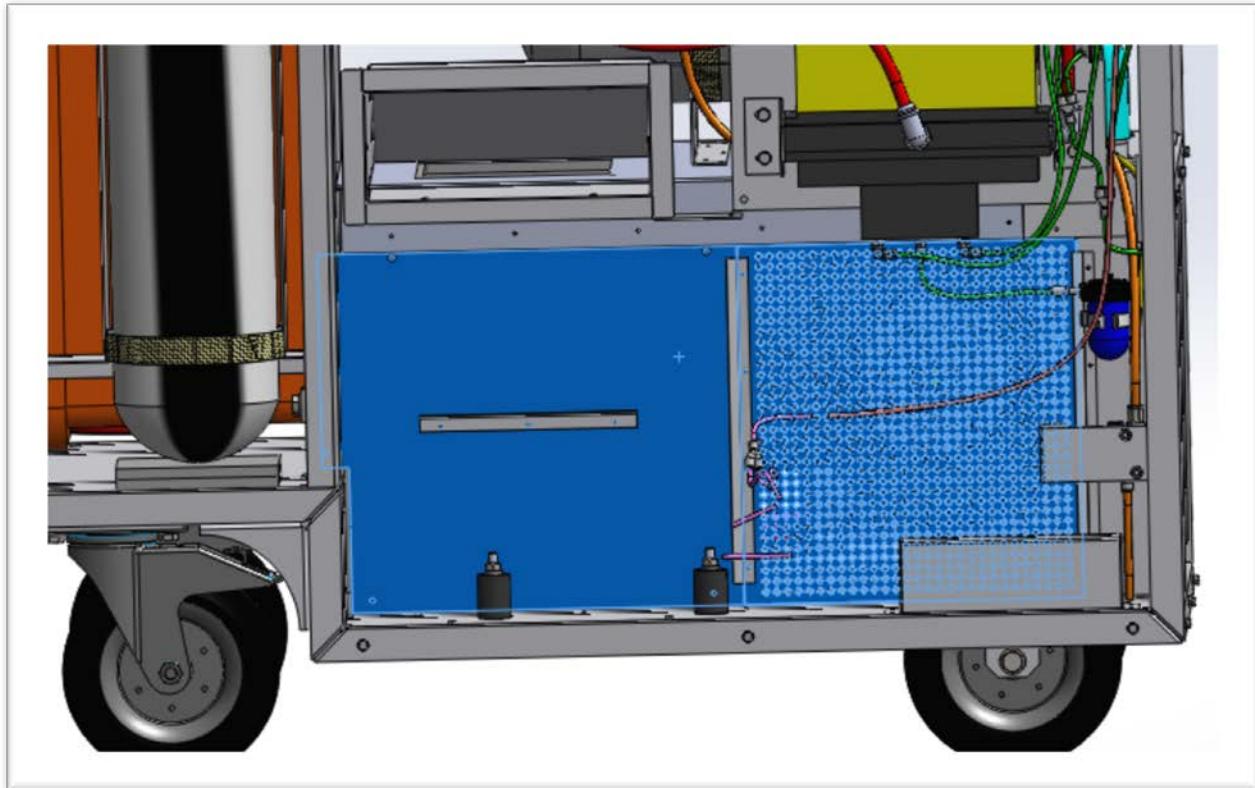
The blue guard doors covering the motor, transmission and scroll compressor element
